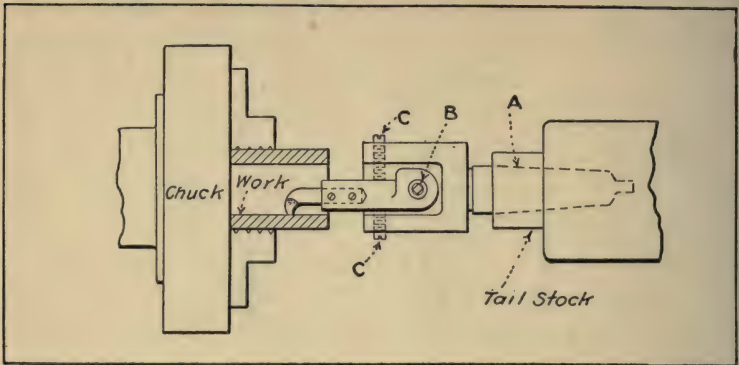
TOOLMAKERS' ADJUSTABLE BORING TOOL
